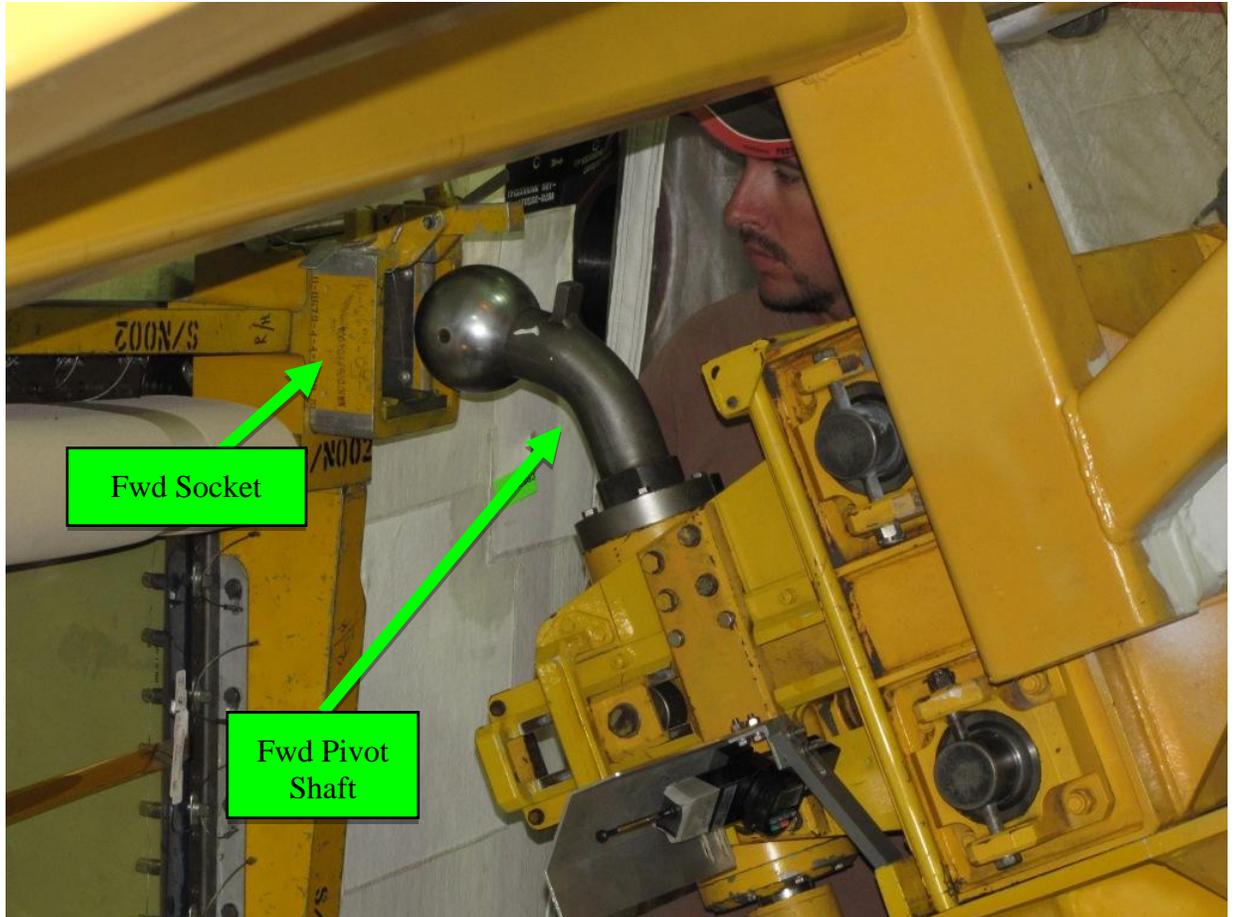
Fwd Pivot Shaft Being Aligned with Fwd Socket
